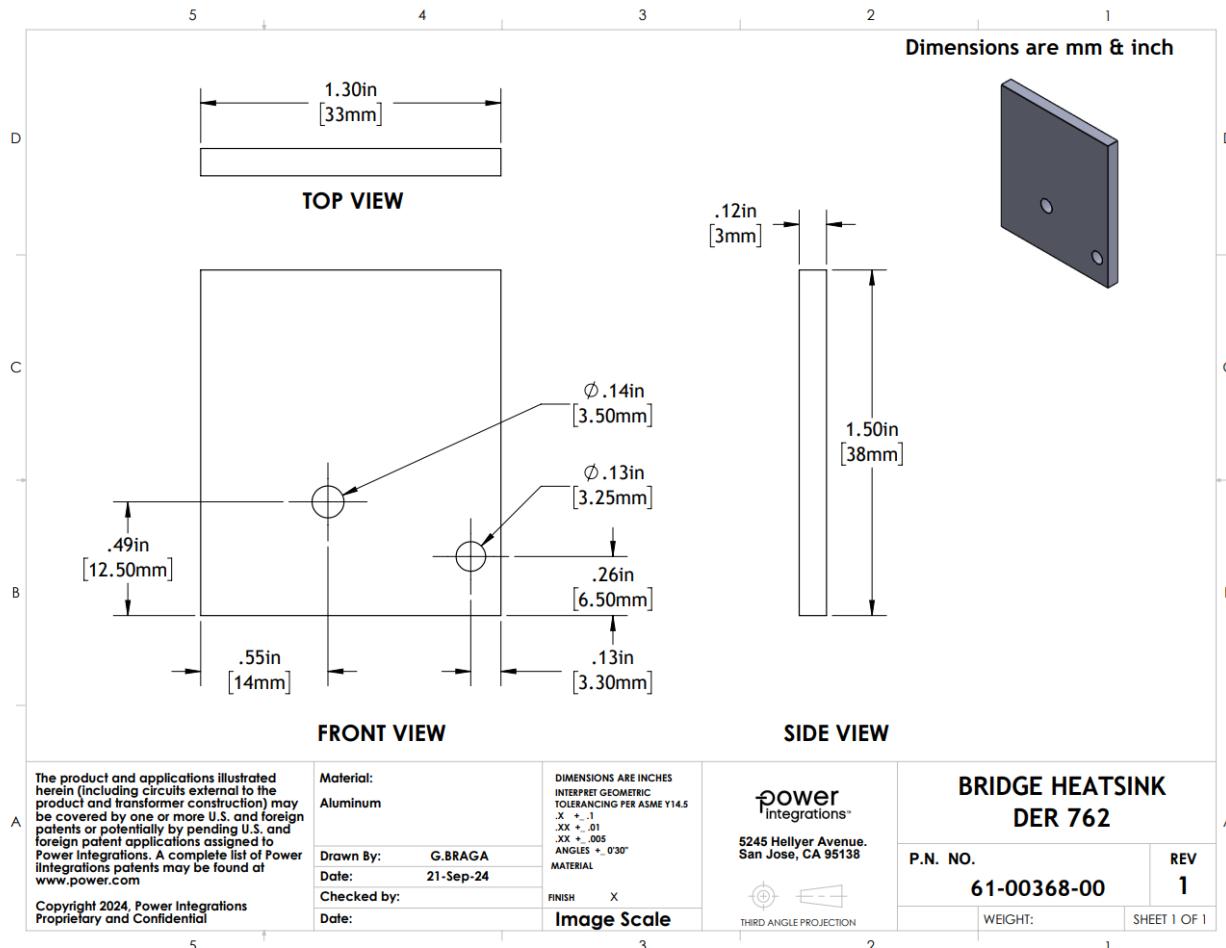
DER-762 Bridge Rectifier Heat Sink Metal Drawing.
